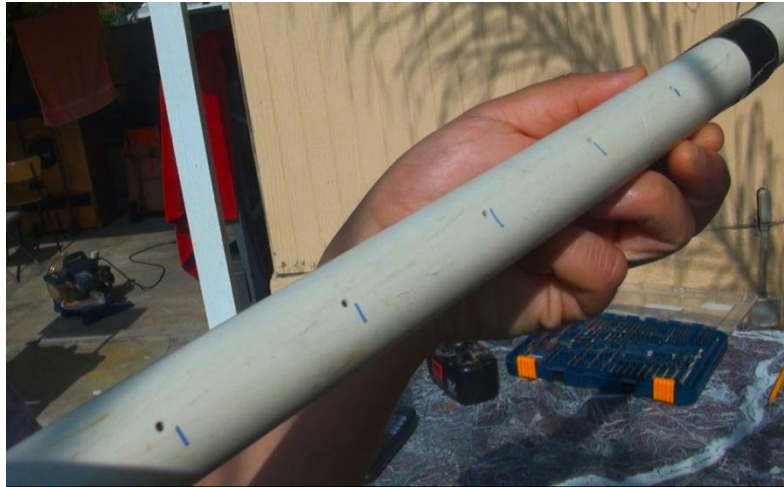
PVC pipe-fixture with Drilled Holes
